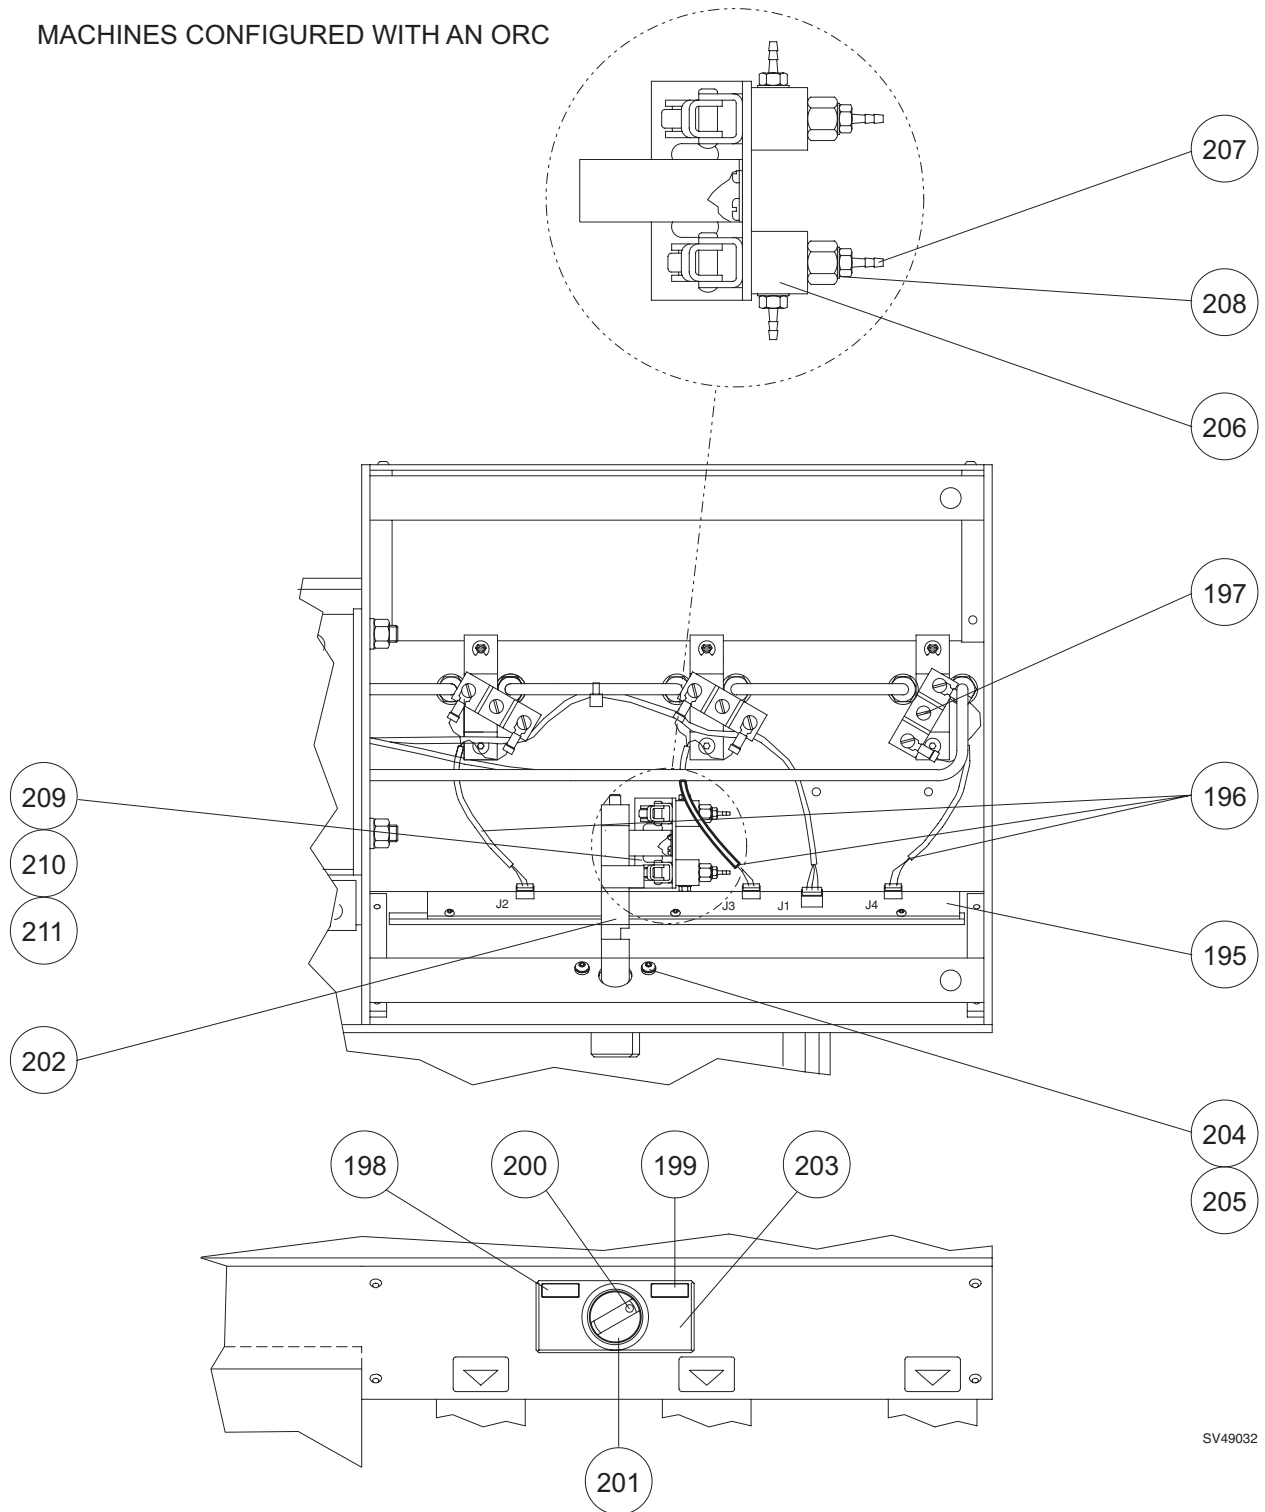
Fail-safe Assemblies, Minimum O2 Flow Valve Assembly
